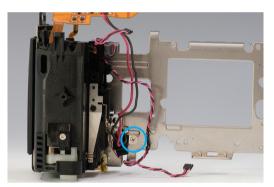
Position of Right Side Cover Ass'y Screws (Front)
